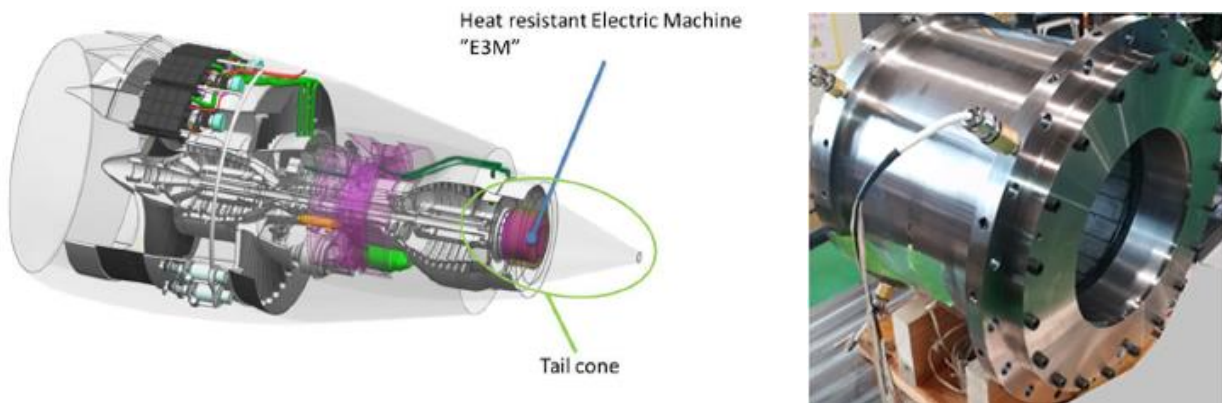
250kW E3M (Engine Embedded Electric Machine) [3].
